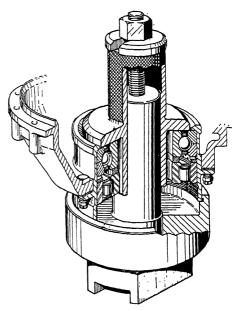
WITHDRAWING AIRSCREW SHAFT BEARING.
